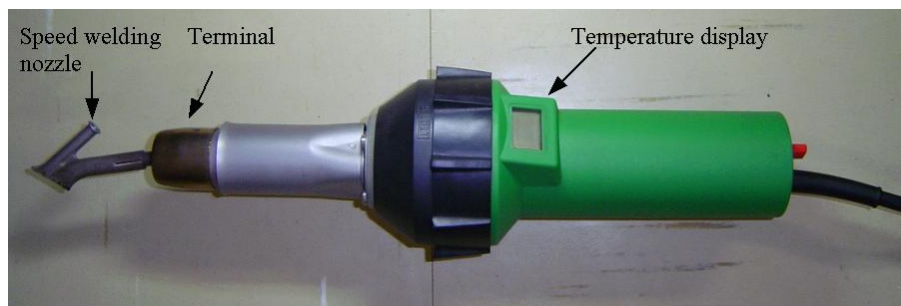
Hot-gas welding tool, with a speed welding tip
